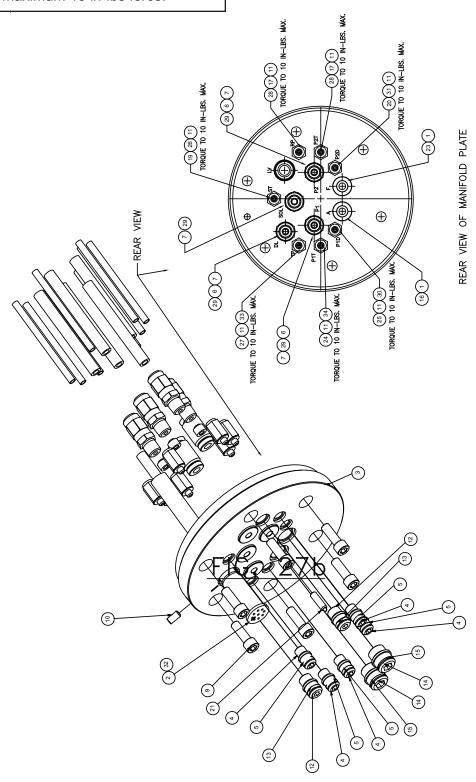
A10853 Rear Tubing Manifold Assembly - Metric
